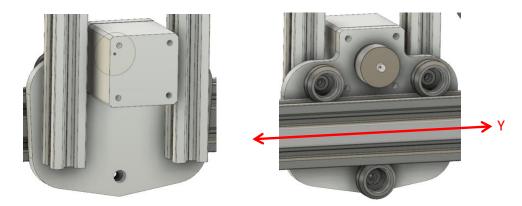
A closeup of the Y carriage assembly. Three V-slot wheels screwed to the plate rest in the V-groove of the extrusion. The Z shafts and the Y-axis motor are also mounted to the plate.
